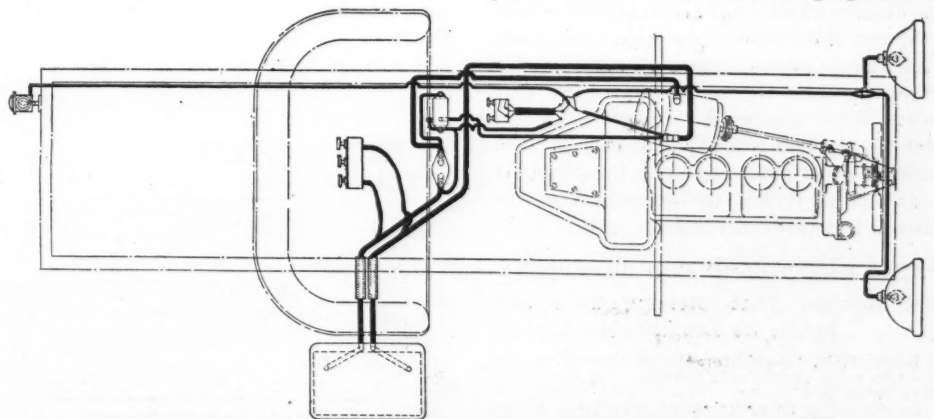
Wiring diagram of Ford equipped with starting and lighting system, showing how to wire to gang switch to take care of spotlight, horn, etc.
